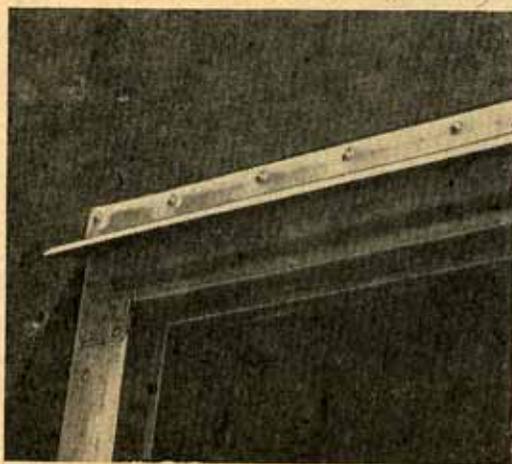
Aluminum strips are screwed around all raw edges of door, frame and body. Drip molding is bent and fastened above as shown.
